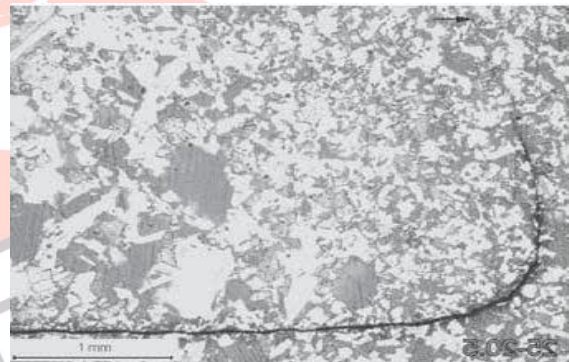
Joint line hooking in a 50 mm thick copper FSW weld.
